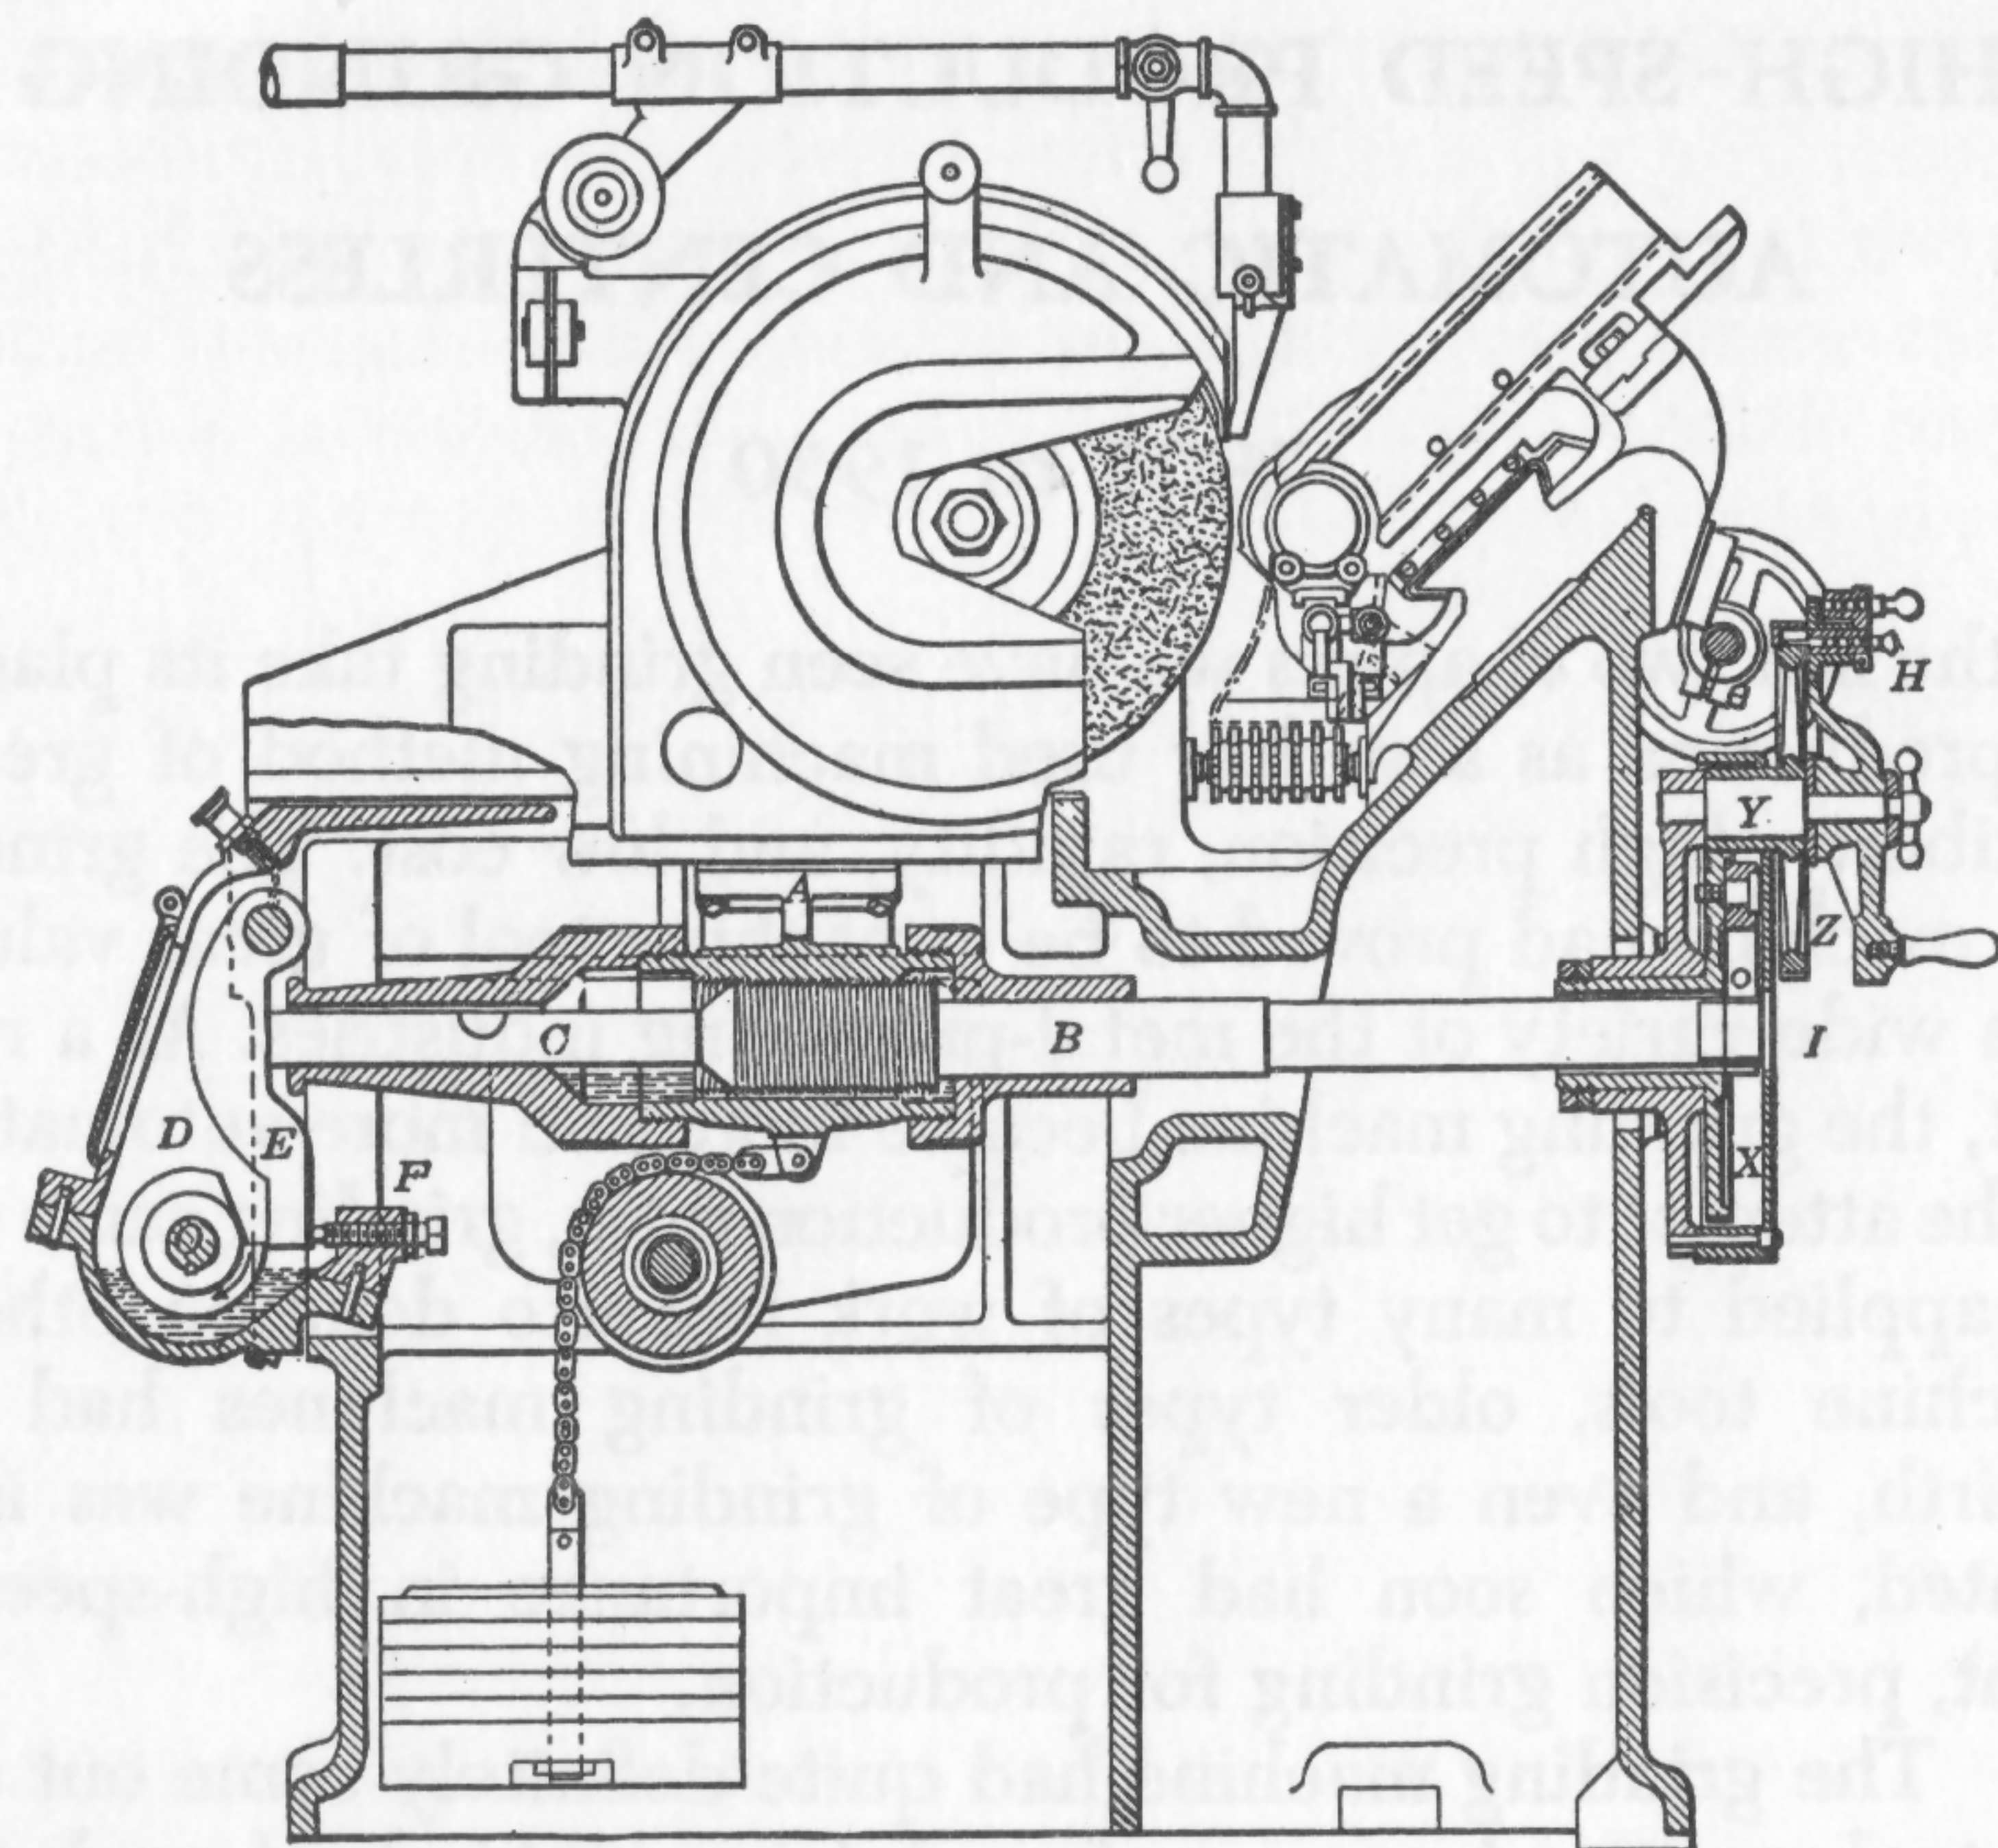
NORTON AUTOMATIC GRINDING MACHINE FOR BALL BEARING RACES, 1908 (Colvin and Stanley)
